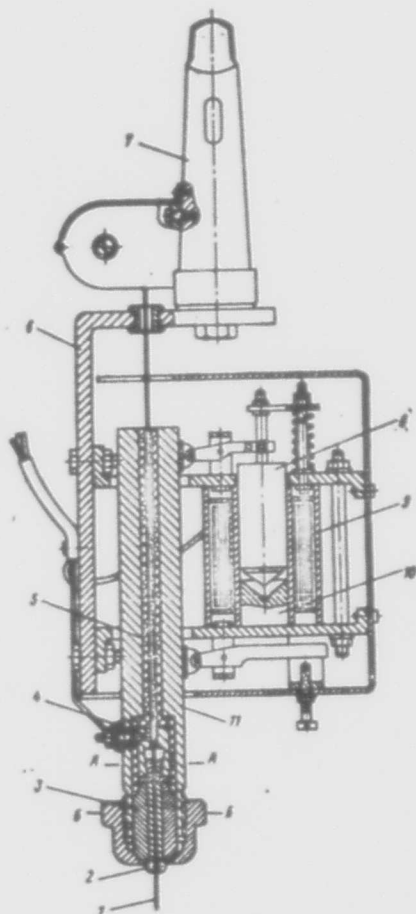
Electric spark head for broaching holes of small diameter. 1) electrode wire; 2) rudy tip; 3) jig; 4) terminal; 5) insulation; 6) casing; 7) shank; 8) mobile core; 9) electro-magnet; 10) fixed core; 11) rod.
